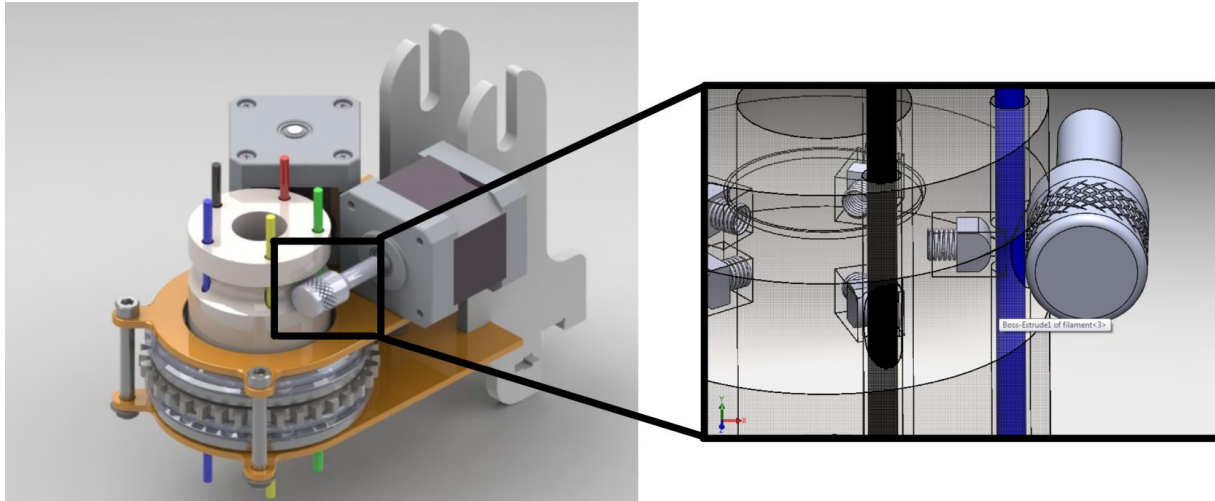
Cold-end design diagram and wire-feeding mechanism [14].
